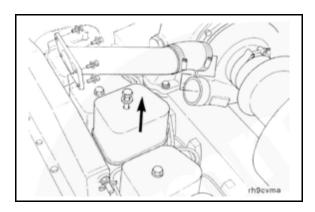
REMOVE ROCKER LEVER COMPONENTS
